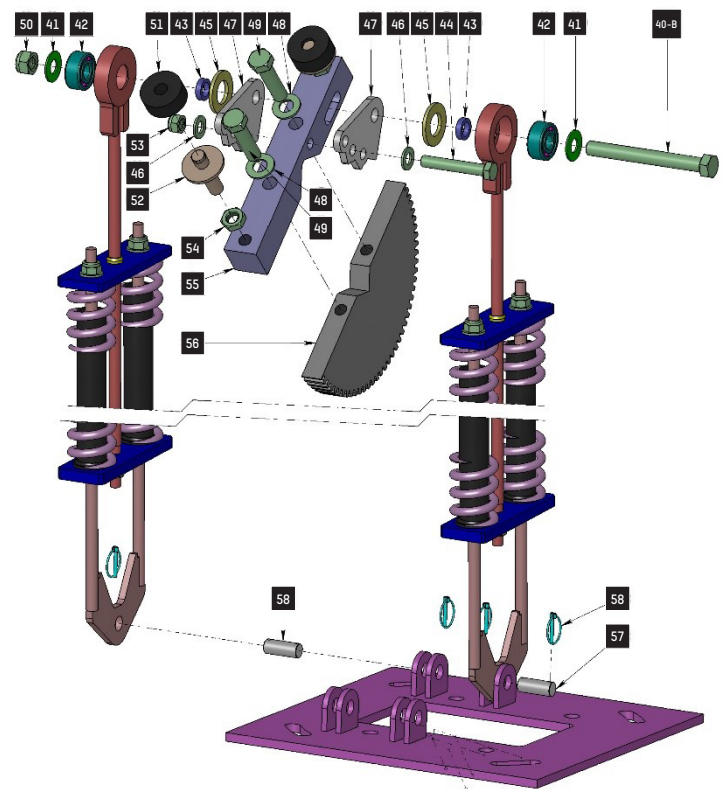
Mounting of a spring assembly (4 to 6 springs)
